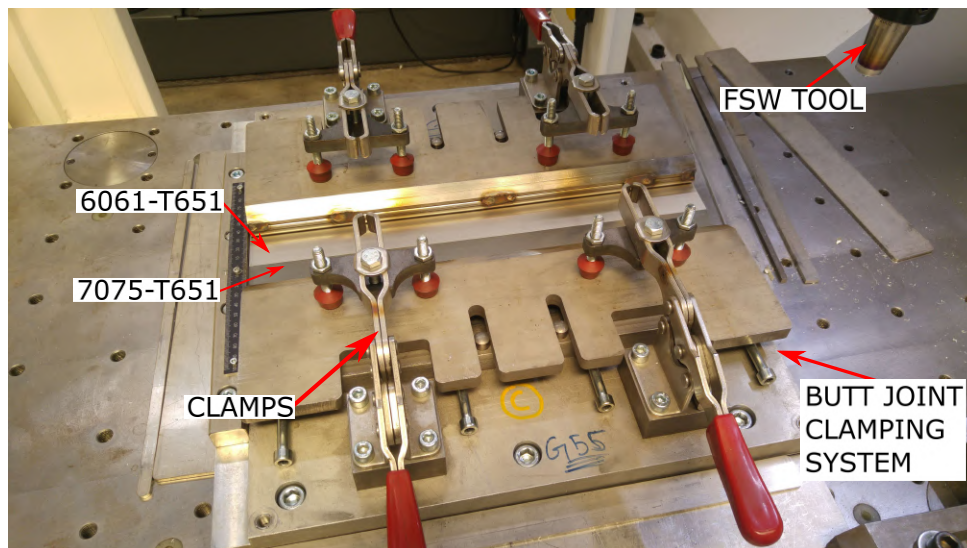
Welding setup (showing clamps) for a butt joint 6061/7075 (6 mm) on the FSW machine.
